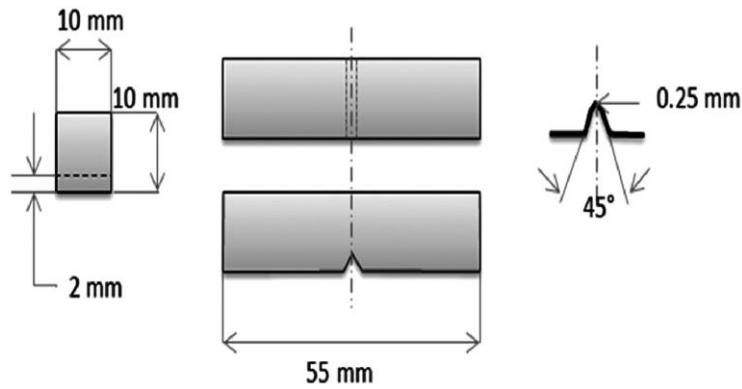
Dimensions of Type A Charpy impact test specimens.
